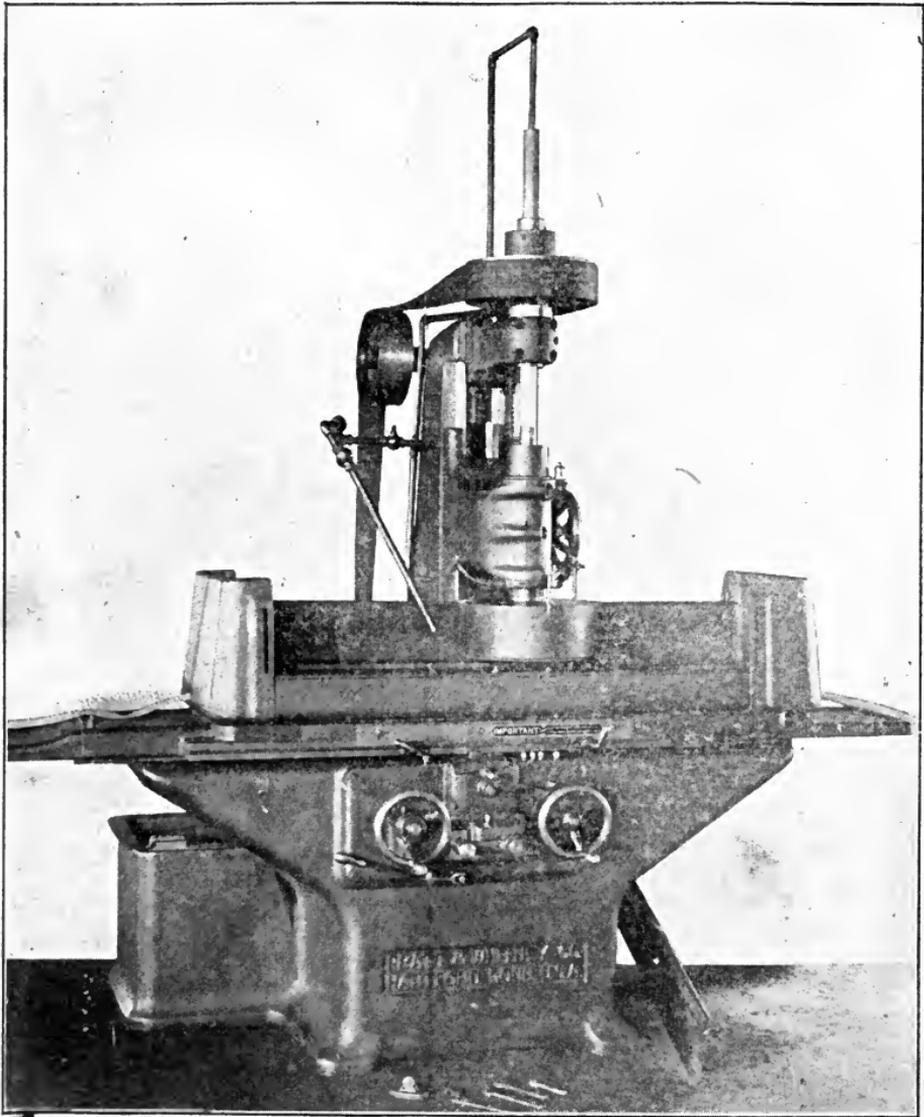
Pratt and Whitney Grinding Machine Using Magnetic Flat Chuck
